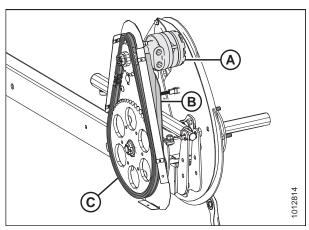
Single-Reel Drive Shown – Double Reel Similar
